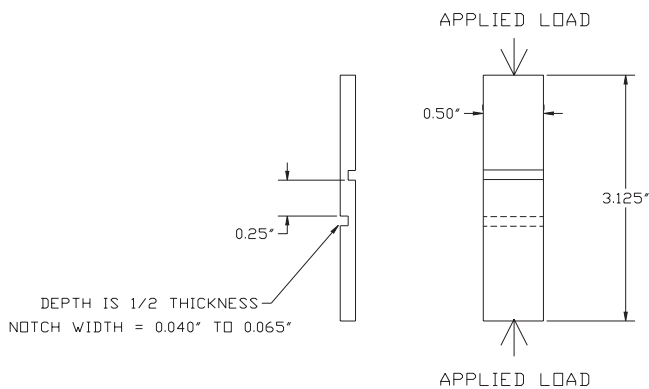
Test Specimen Configuration for ASTM D-3846 In-Plane Shear Test
